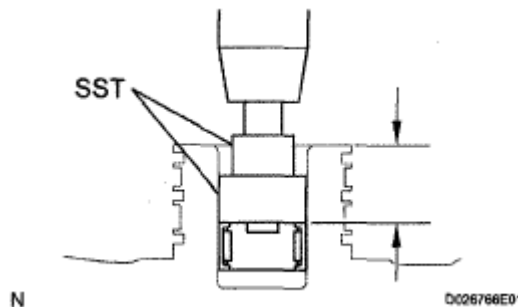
Pressing Needle Roller Bearing Into Transaxle Rear Cover
